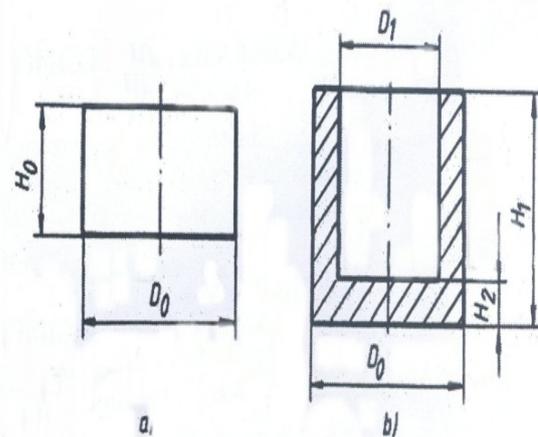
Reverse extrusion of a part: a) blank, b) extruded product.
